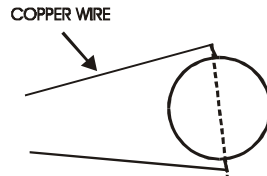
Wire through Bead. A silver bead with a copper wire threaded through the bead holes provides a safe way to hold onto the bead during sanding and polishing. When hand sanding, grasp the wire between your thumb and index finger; bank the bead against the Alligator Skin[®] taped tip joint of your middle finger.
